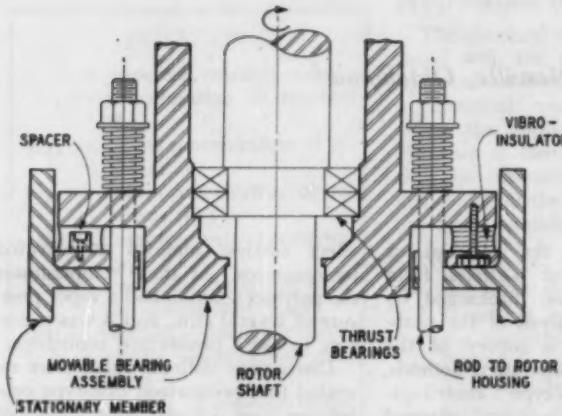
Details of rotor shaft suspension for Merco centrifuge.
